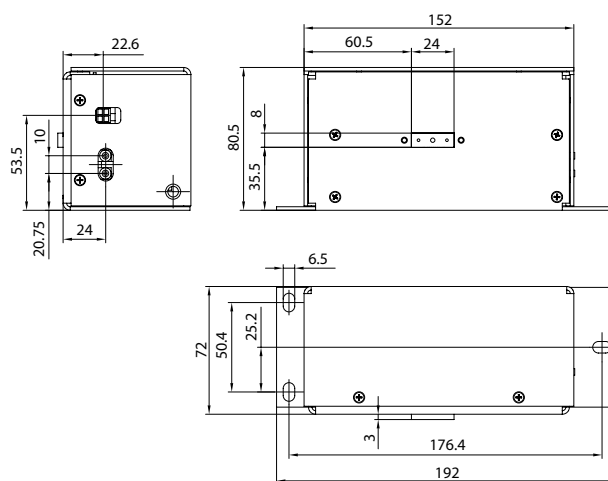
Outline drawing of encased version DPB-3 and DPB-2.5 drivers with PS-5 power supply
